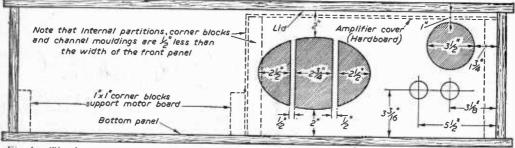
The front panel showing the cut-outs required for the loudspeakers and control knobs.
